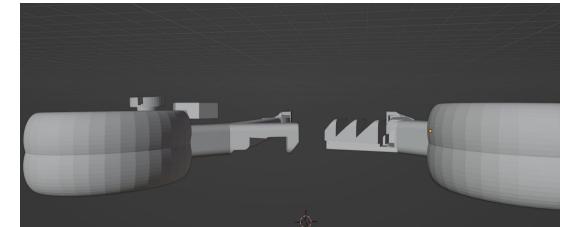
Prototype #3 -Connected Needle Driver with Large Rings and Circular Locking Mechanism
